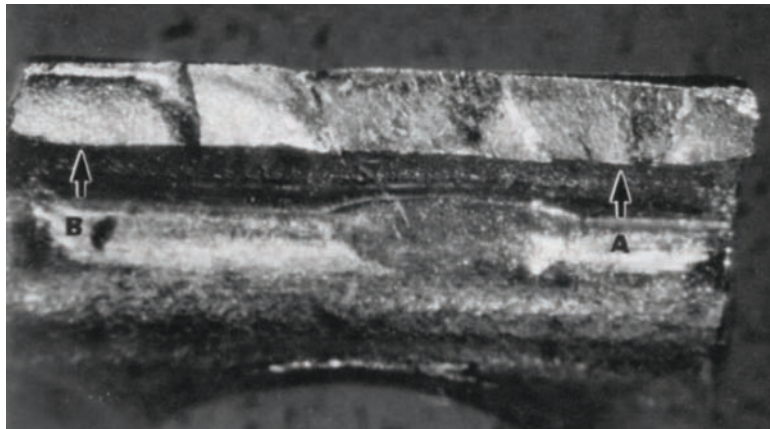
Fracture surface of failed ice cream mixer blade. Arrows indicate fatigue crack origins. Original magnification: 13×
